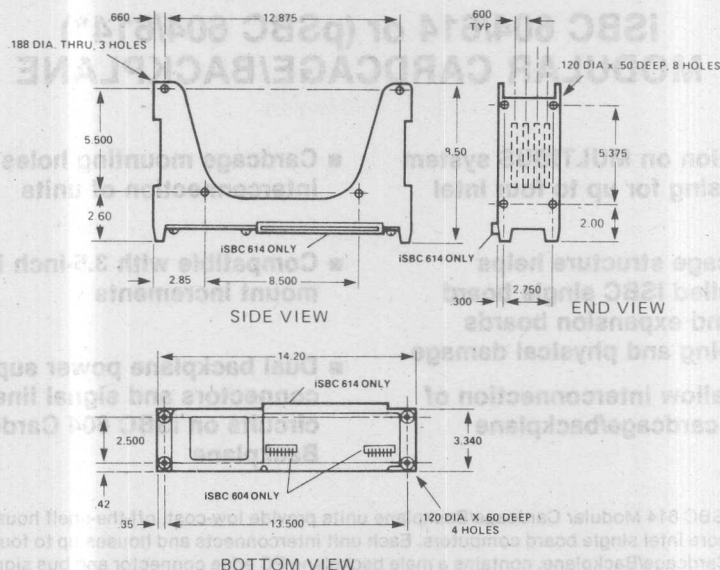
iSBC 604/614 Modular Backplane and Cardcage Dimensions
